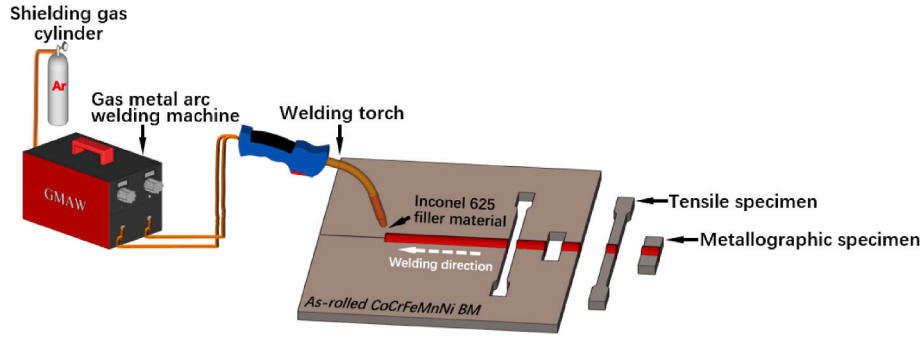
Schematic representation of the experimental setup used for gas metal arc welding.
